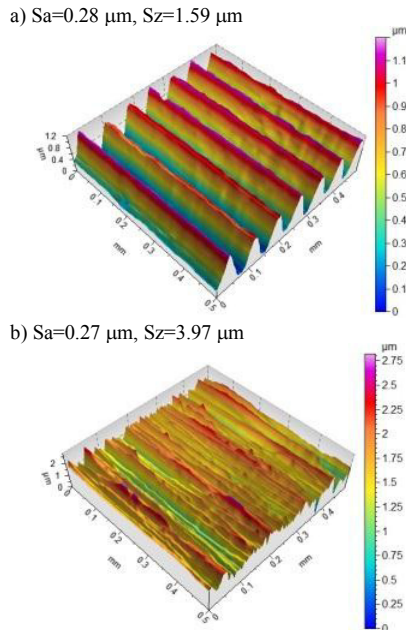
Surface textures produced by HT (a) and grinding (b); zoomed isometric views
